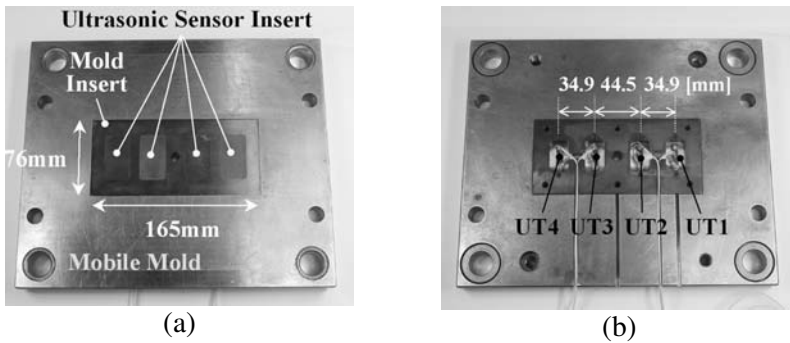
Mobile mold with four HTUT sensor inserts embedded in the mold insert.
